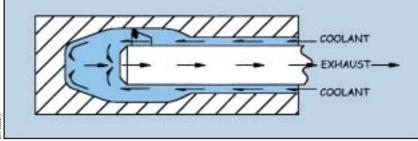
To evacuate chips from a blind-end bore, high volumes of coolant are forced into the bore along the outside of the tool. The coolant and chips are exhausted through the center of the tool.
